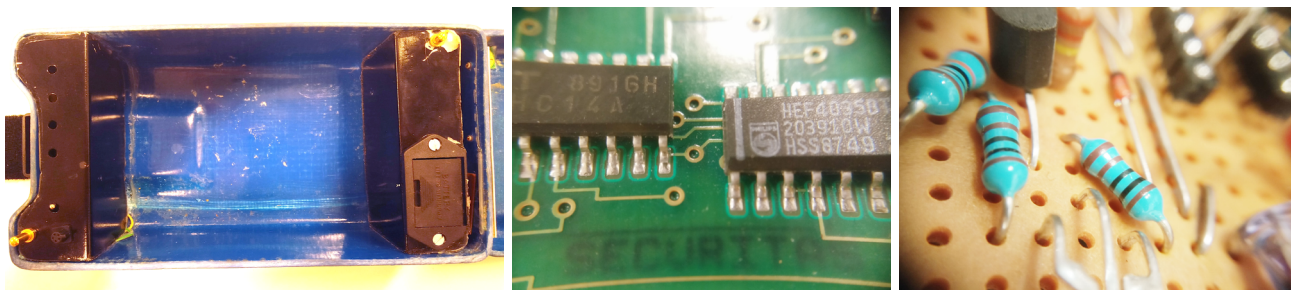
a) Re-assembled box with metal components on each side. b) PCB board with 90 degree sharp angles, also showing the socketed chip and security imprint. c). The prototype board closeup.
